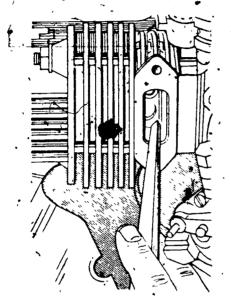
Use a hardwood scraper to remove carbon from the exhaust ports
